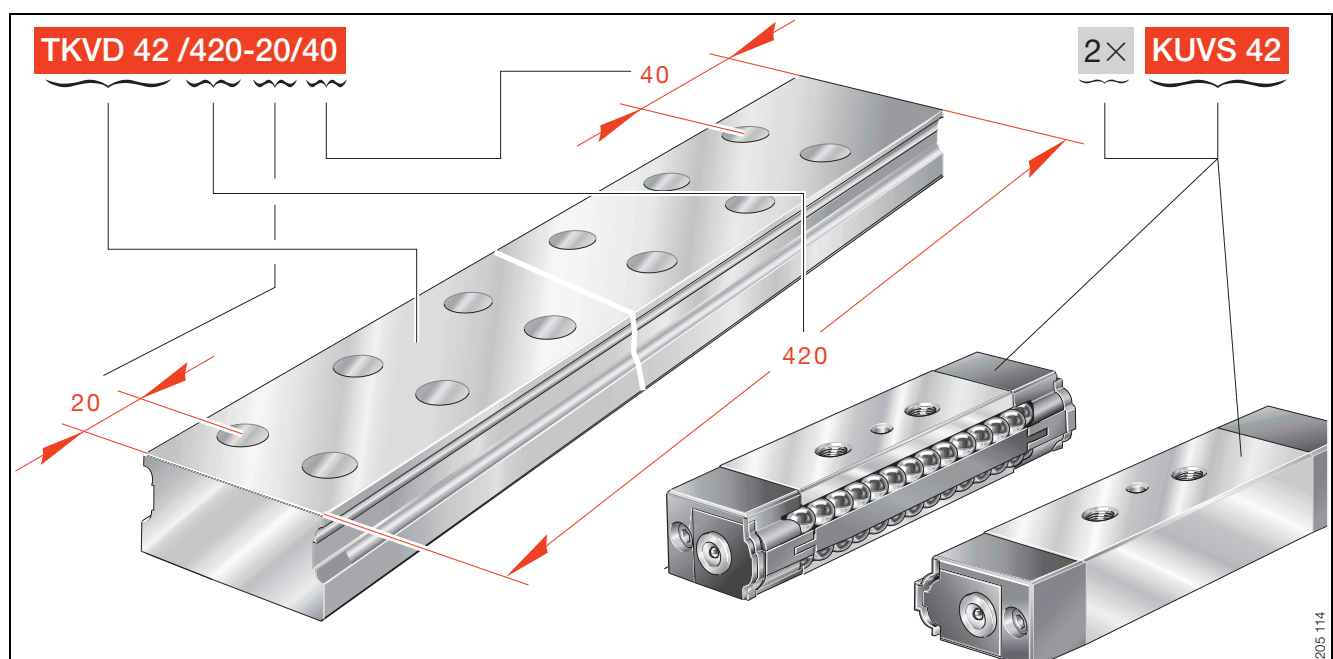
· Ordering example, linear recirculating ball bearing units with guideway
